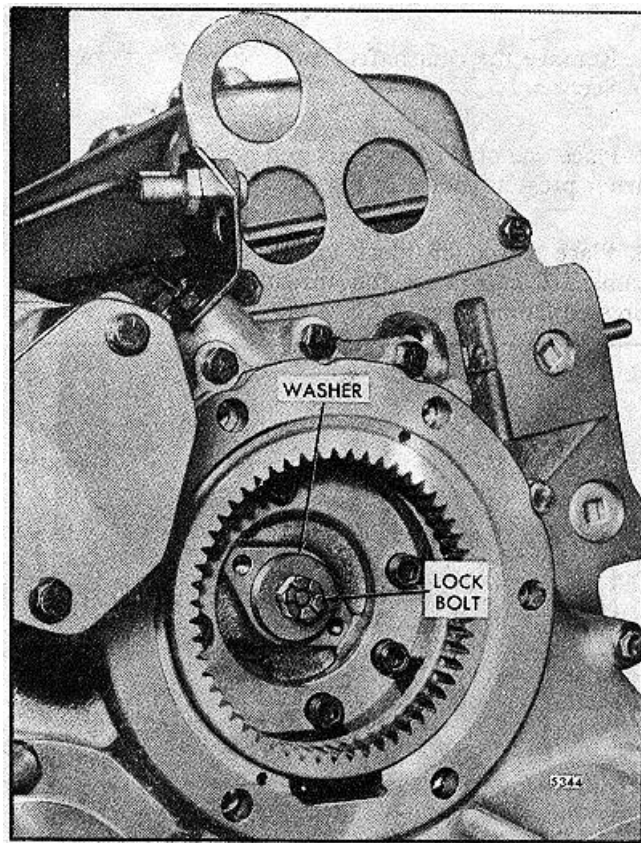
Left-Hand Rotation (Right bank) Camshaft Gear Mounting
